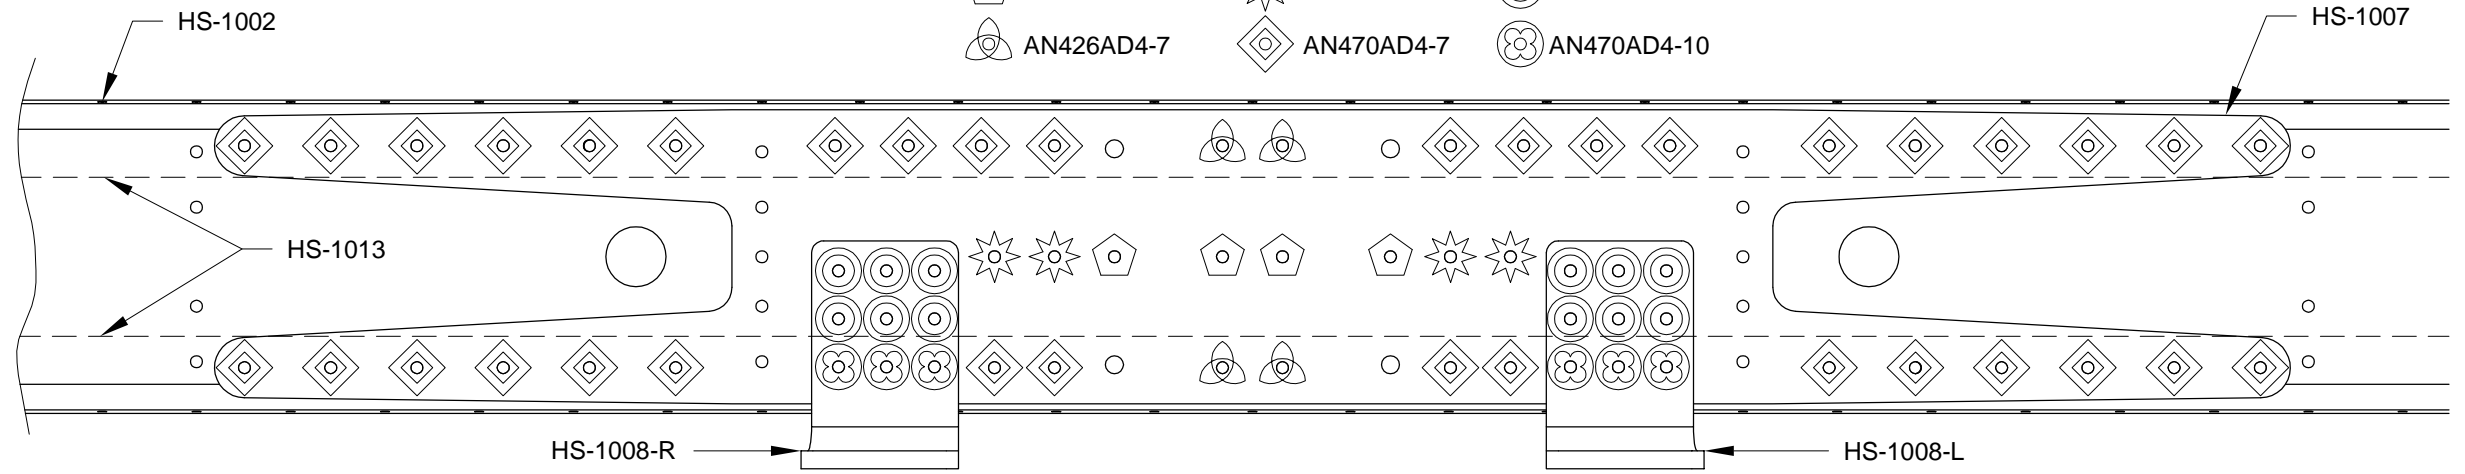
FRONT SPAR DOUBLER RIVETS
